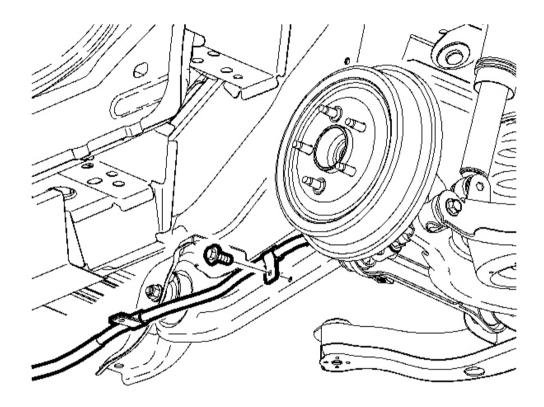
Park Brake Cable Clip & Trailing Arm Courtesy of GENERAL MOTORS CORP.
